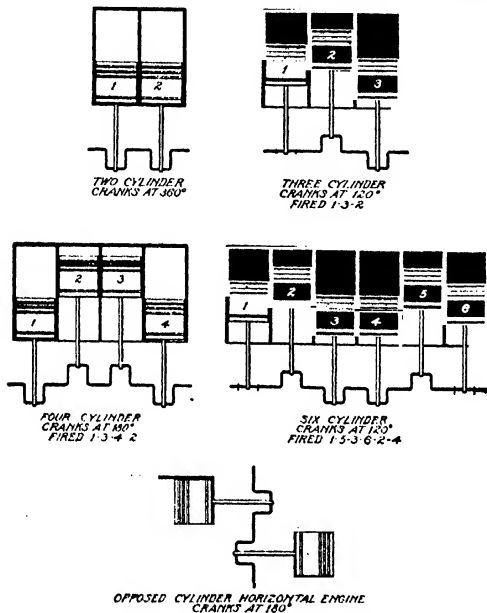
Arrangement of Multicylinder Four-Cycle Engine for Best Balancing
